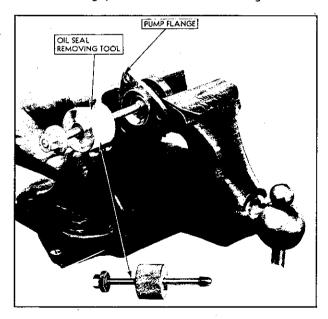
Removing Oil Seals from Fuel Pump Flange.
